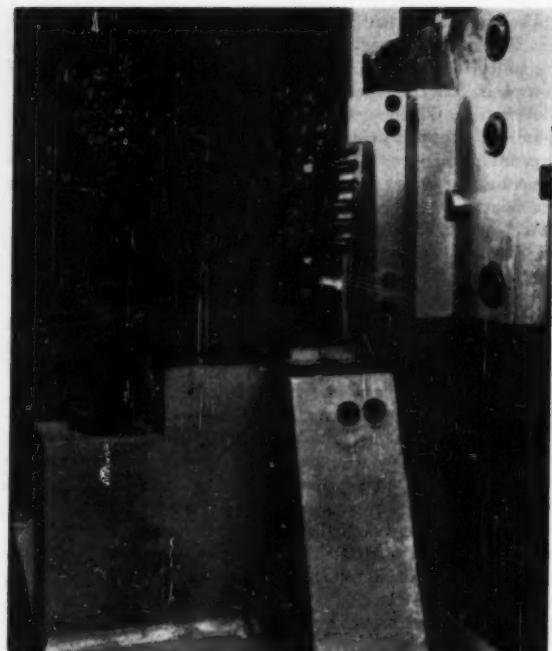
SPECIAL TOOL, TOOLHOLDER, AND CAST-IRON FIXTURE USED IN SURFACE-BROACHING TESTS
